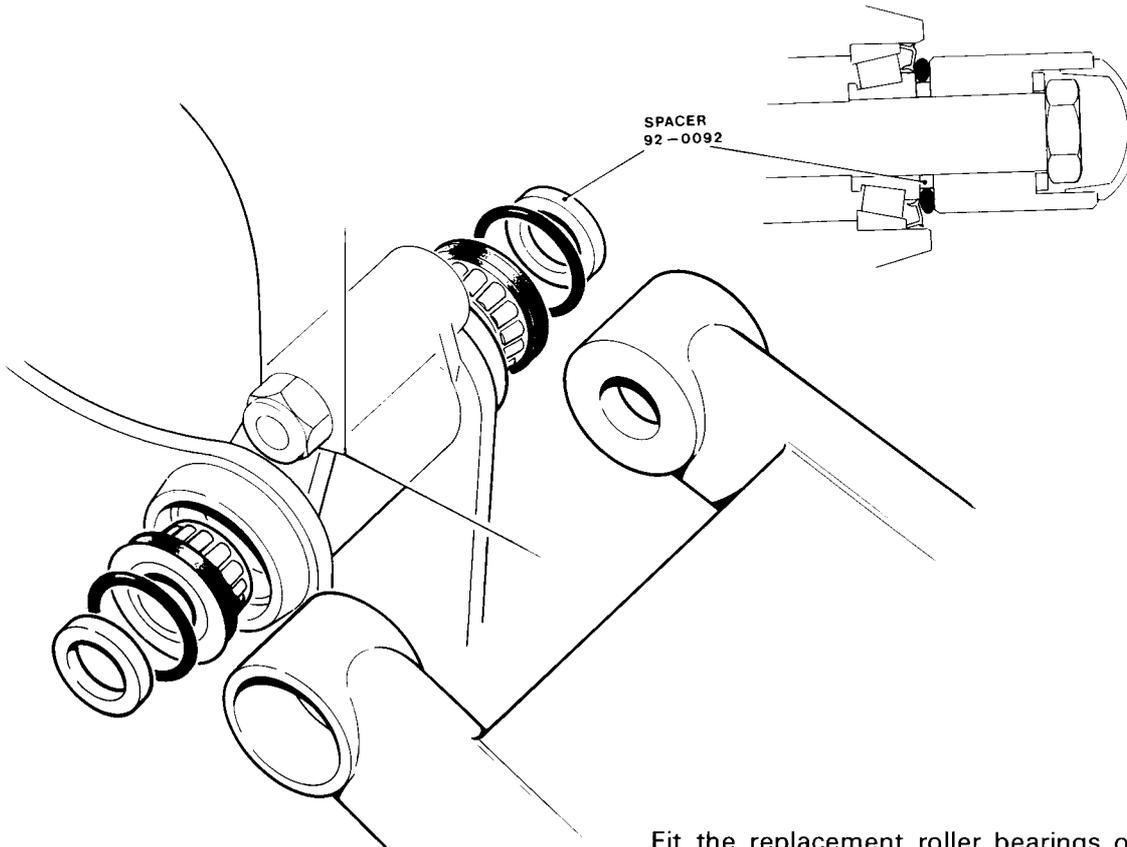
Shimming the Swinging Arm Pivot Bearings
